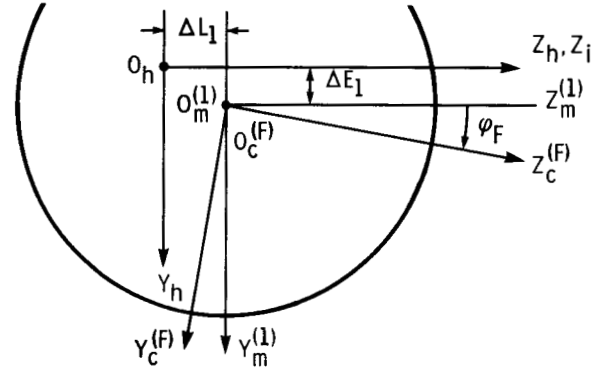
Coordinate system of generating machinery and spiral-bevel gear (gear 2).
